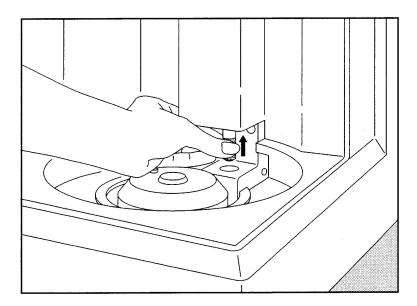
Inserting the T-5699 Tool to remove the upper jaw seal
